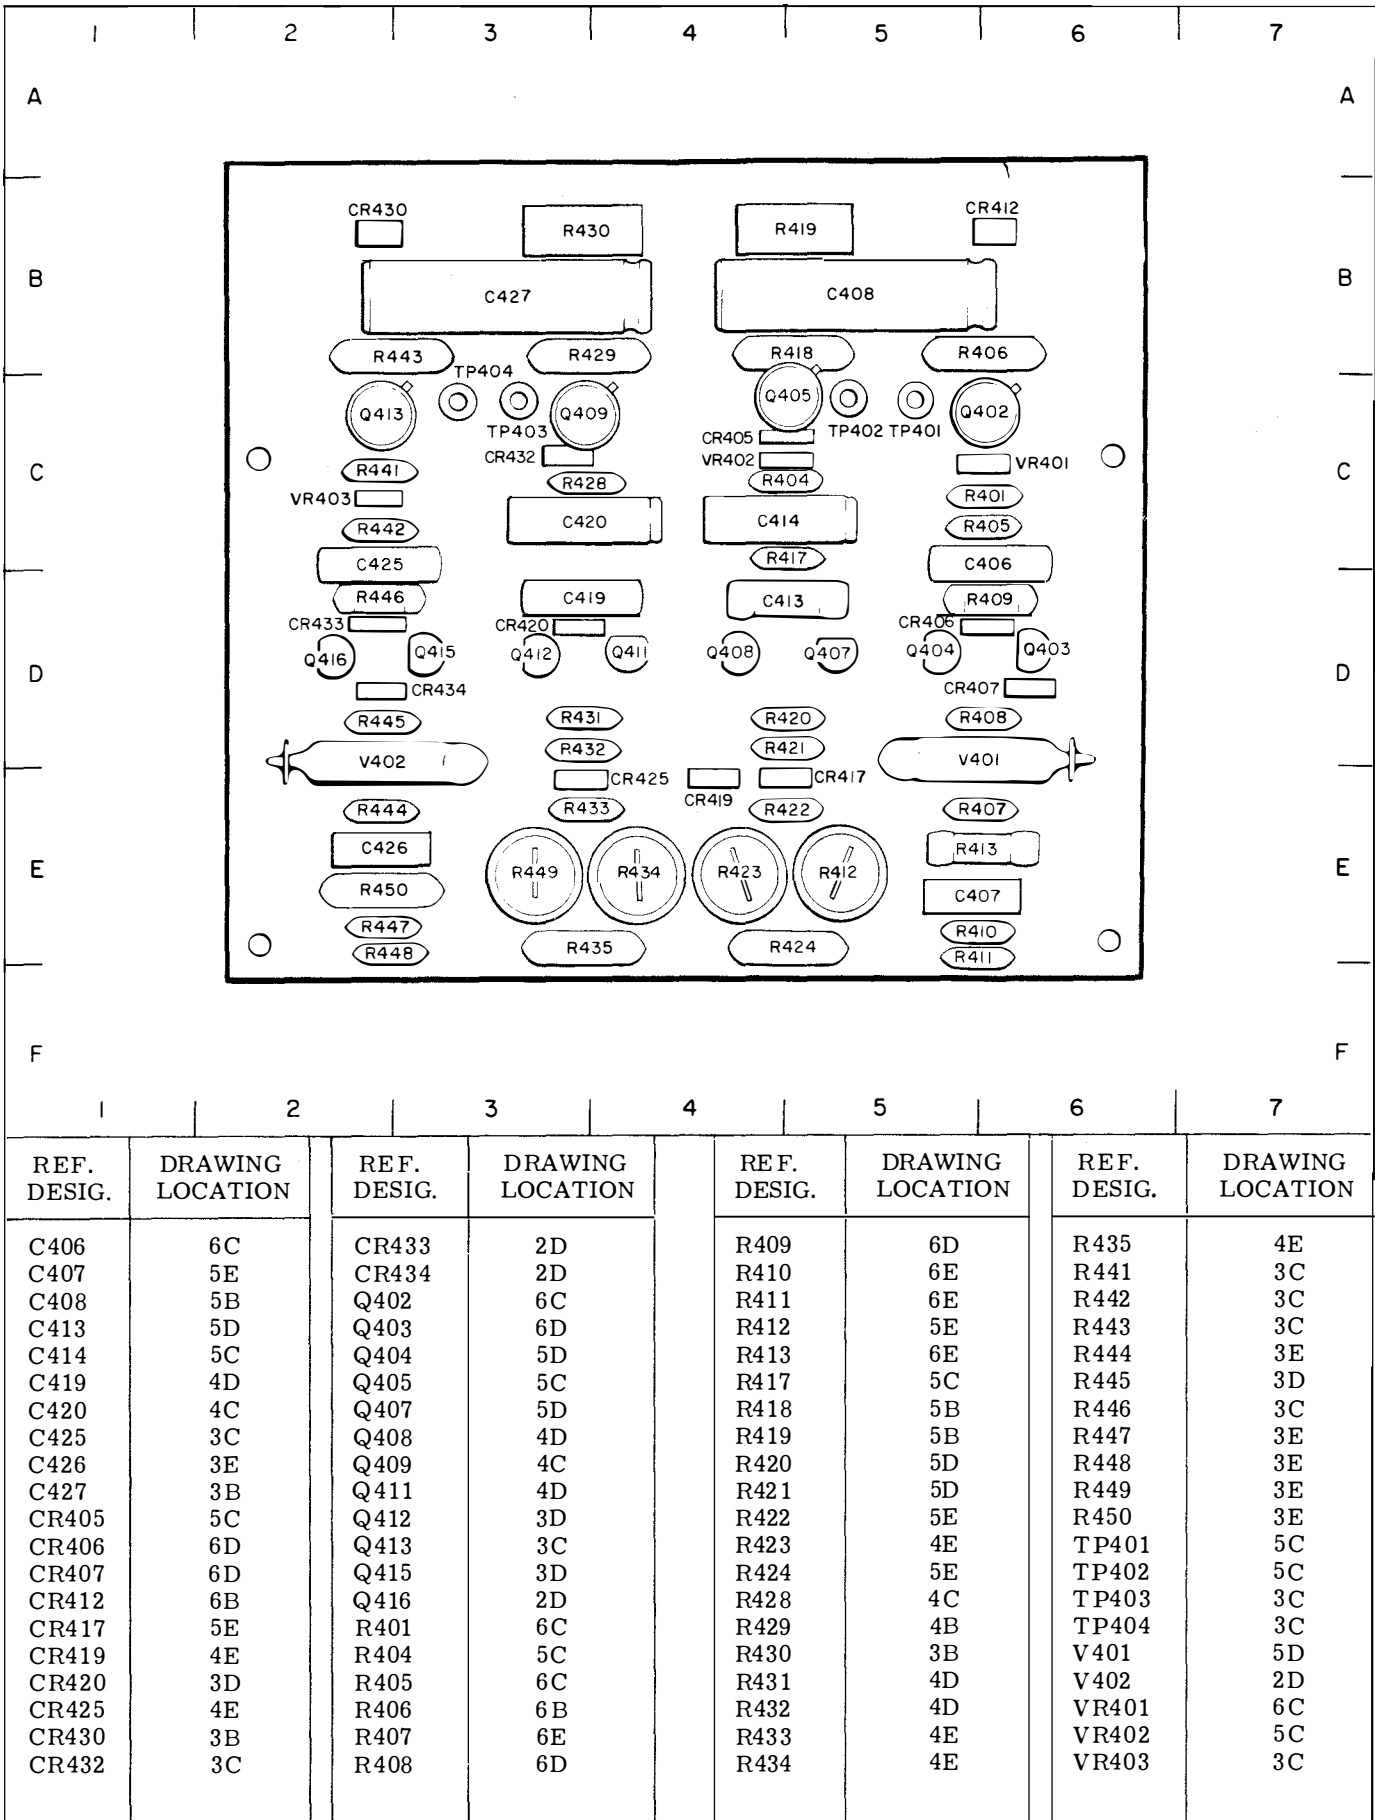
Low Voltage Power Supply Circuit Board A1A7, Location of Parts
